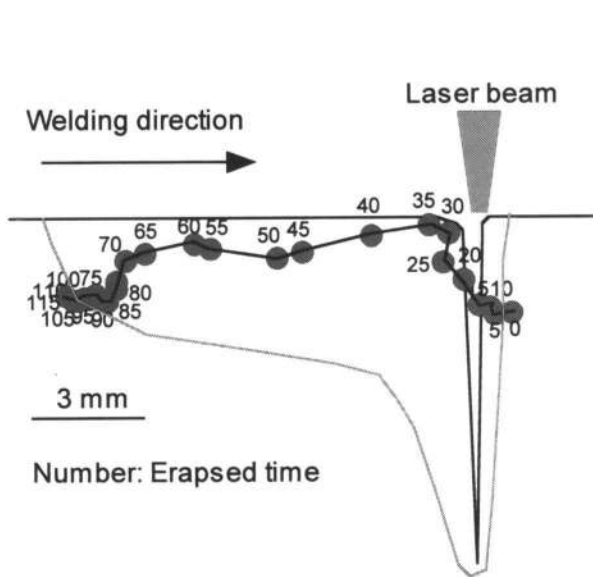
Measured movement of W particle inside molten pool of Type 304 steel, indicating typical liquid flow near upper part of molten pool.
